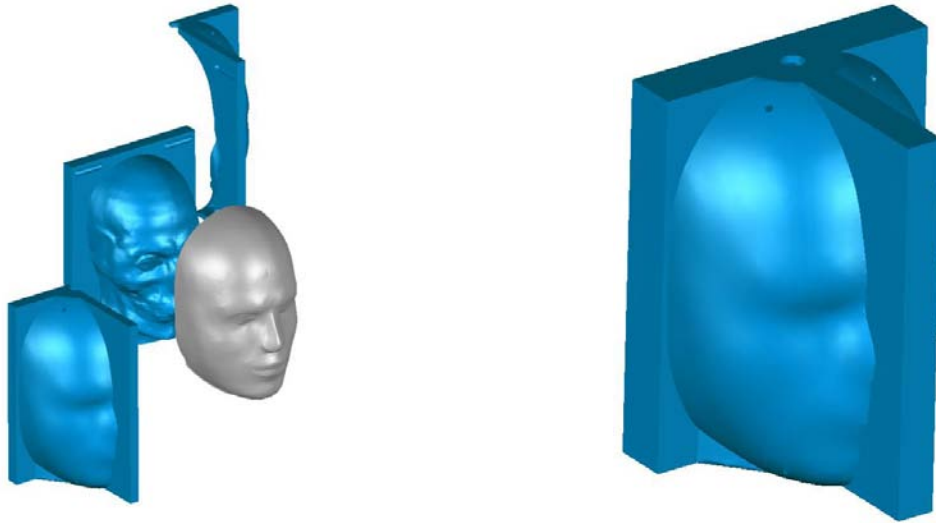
Mold design for casting the frontal fascia of the head surrogate. The molds will be rapid prototyped. Elastomeric urethanes of various properties will be used to fabricate this component so that materials of various stiffnesses can be tested on the surrogate skull.
